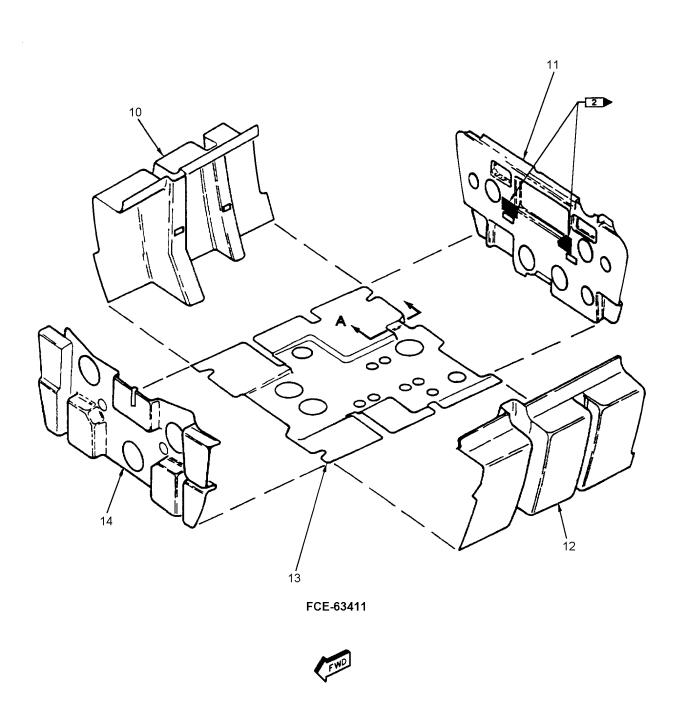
No. 2 Fuel Tank Backing Boards (Sheet 1)
